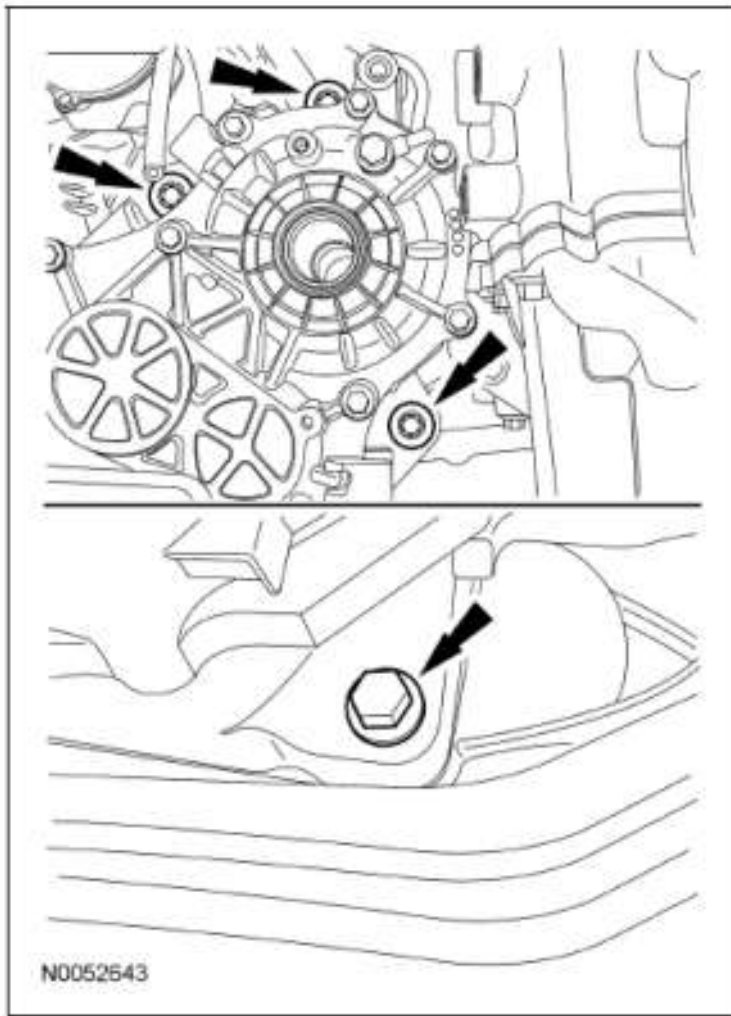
Identifying Transfer Case-To-Transaxle Bolts And Transfer Case
